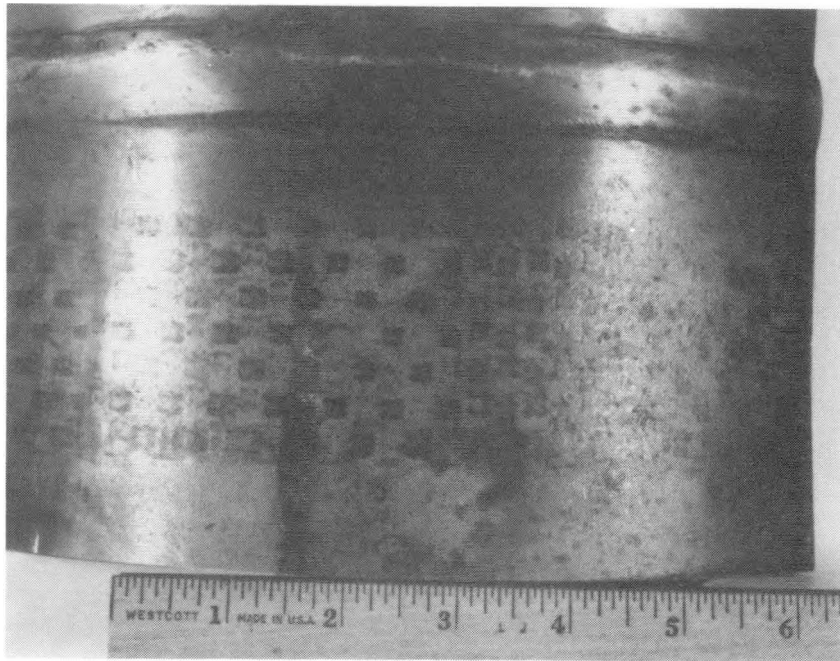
MSIP Tool Marks at OD Surface of 12-in.-diameter Weldment.
